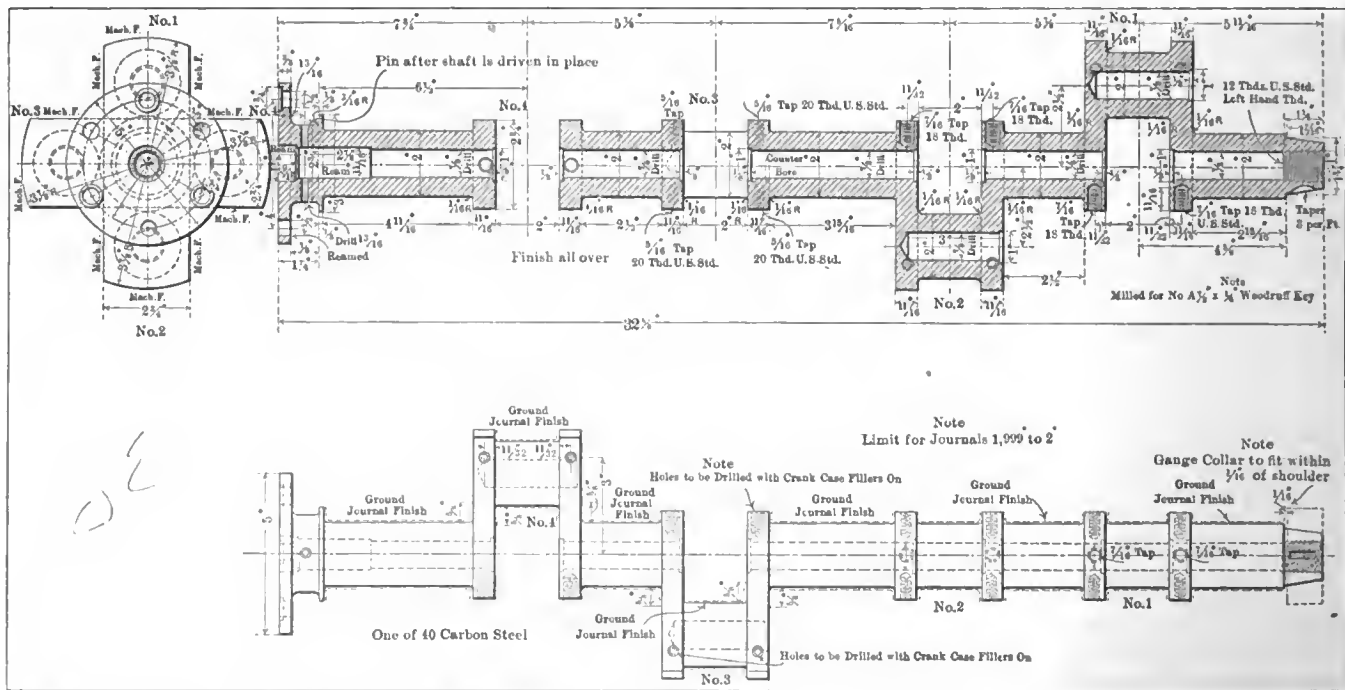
Section of crankshaft, showing arrangement of cranks, amount of metal eliminated by drilling and all dimensions
